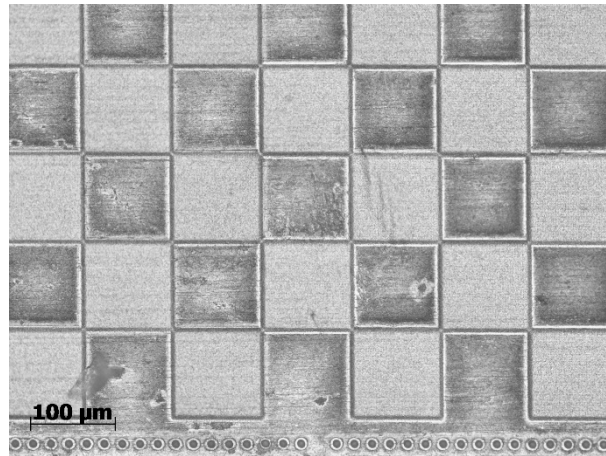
Machined checkerboard structure. The transition is located left to the missing dot in the reference line.
